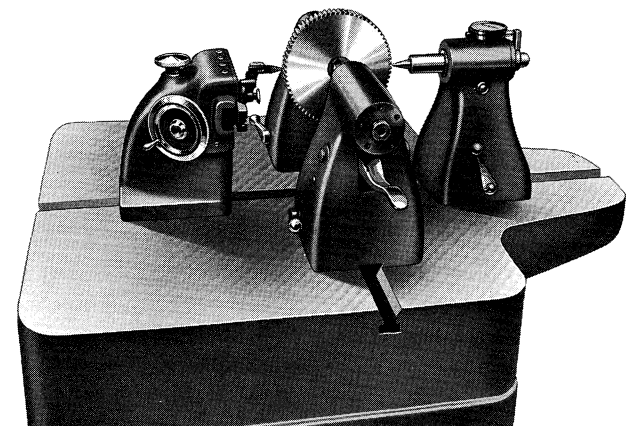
The CPA head at the left on this SIC-ICB universal checker base measures tooth parallelism and crown. The ECA head at the right measures eccentricity and size.
